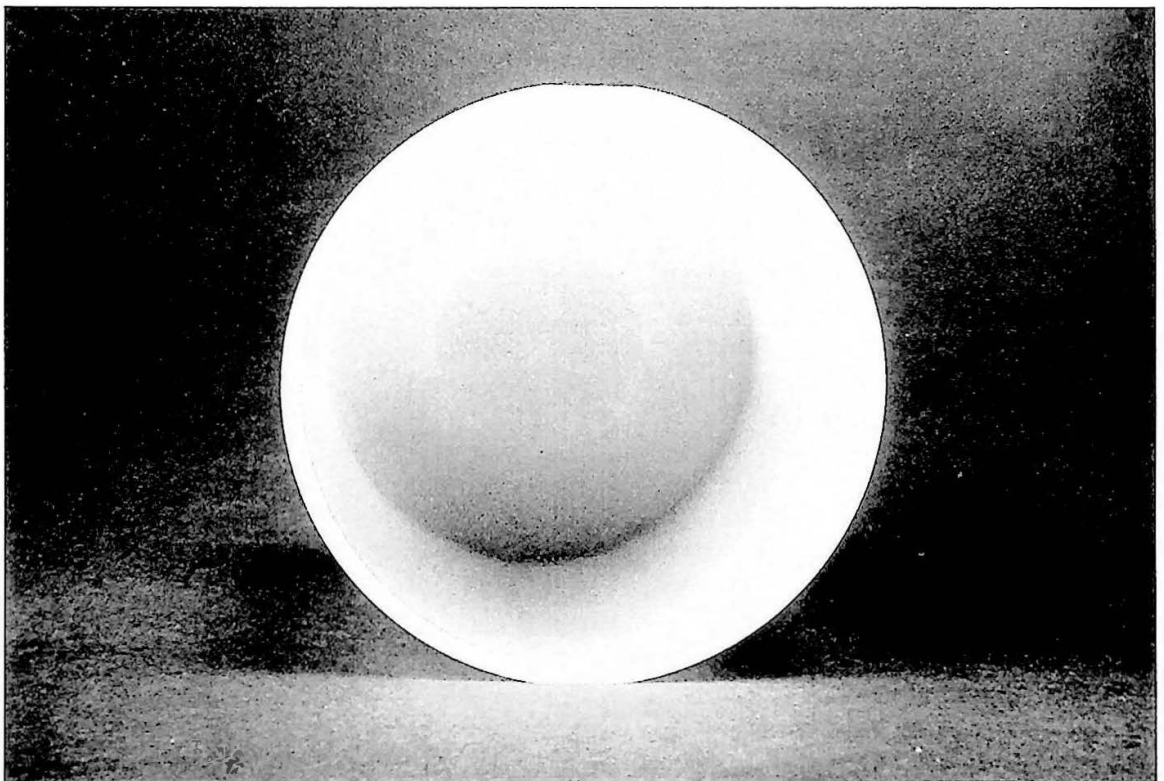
b Example of injection moulded beaker component showing instrumentation location flats
